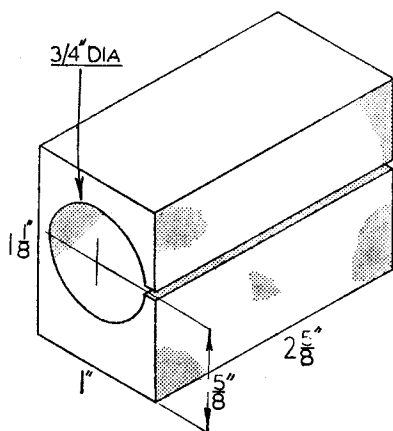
Clamp-piece for securing the drilling spindle to the top-slide
